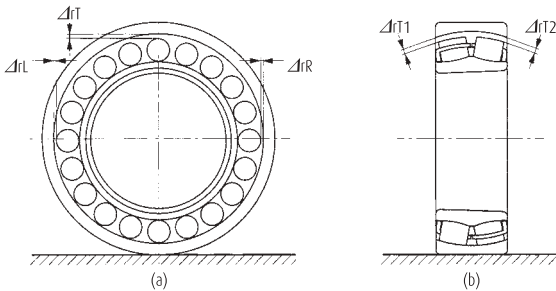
Clearance Measurement Point (Bearing Outside Diameter: Larger Than 200 mm)
